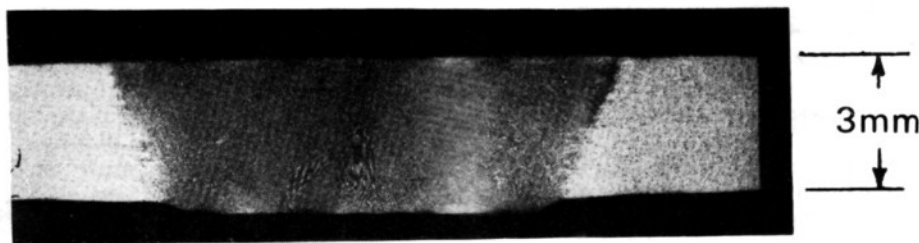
Section of butt weld in Nimonic PE16.
